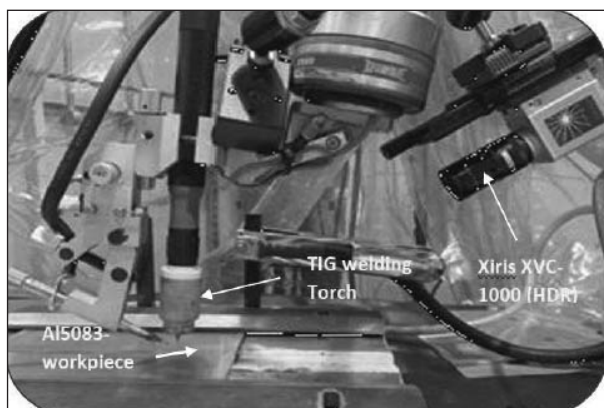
TIG welding experiments conducted on DINSE TIG welding system @ Atlantis Castings, South Africa.
